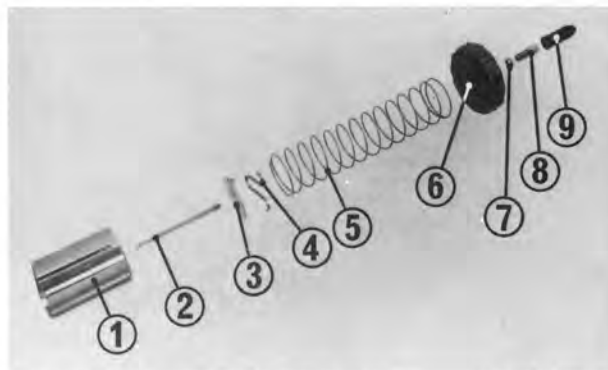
(1) Throttle valve (5) Spring (9) Rubber cap
